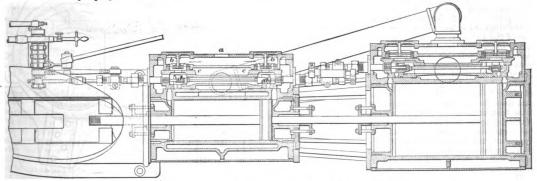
Sectional Plan through One Pair of Cylinders and Valves.
